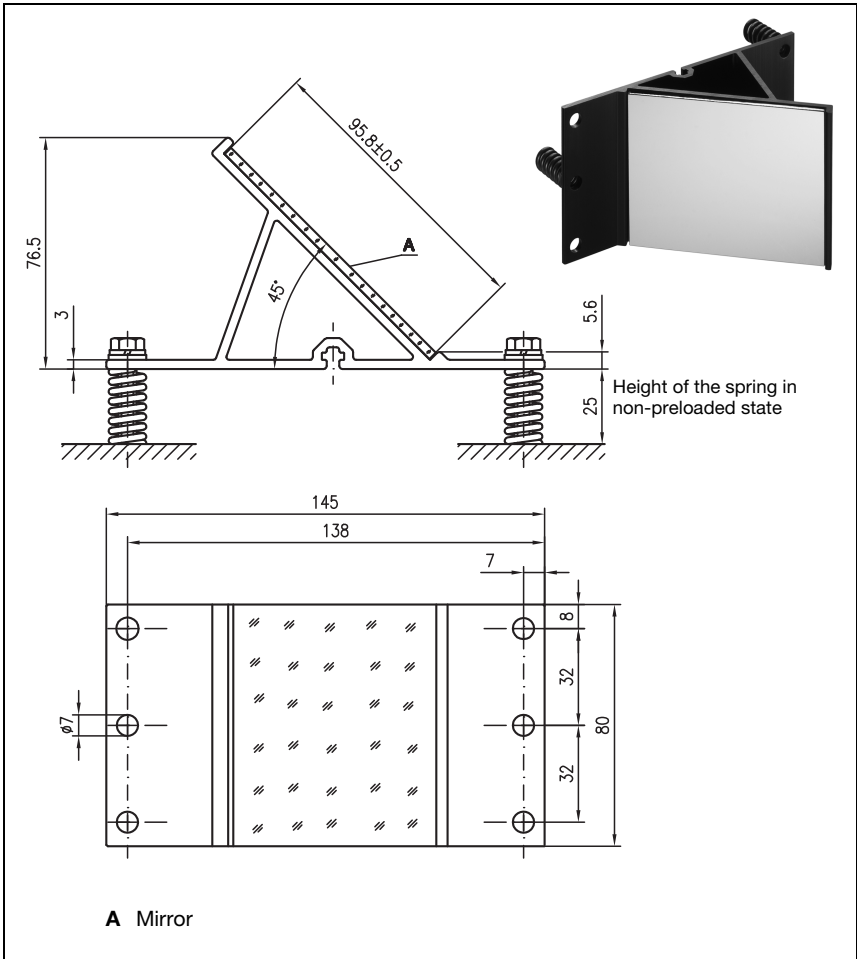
Photo and dimensioned drawing of the US 1 OMS deflector unit
